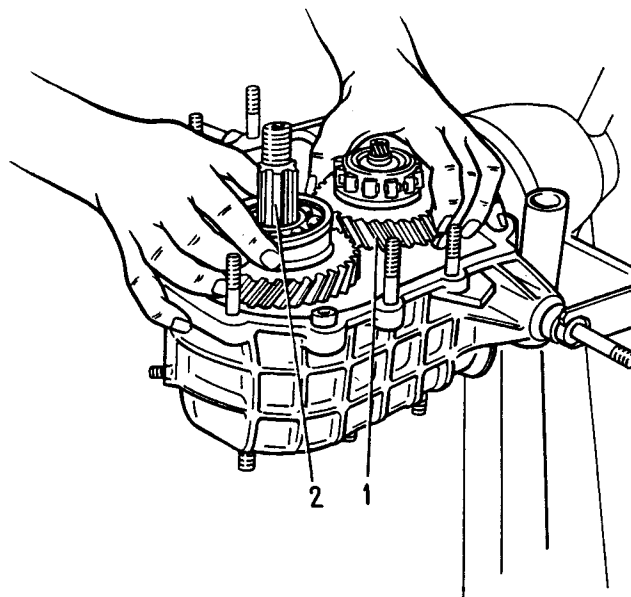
Installation of Drive Shaft and Countershaft:
